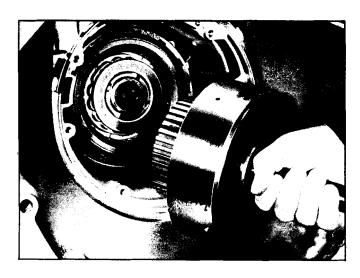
E-61 Removing Turbine Shaft and Forward Clutch Assembly
